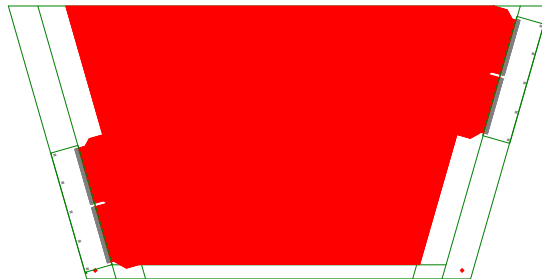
Layout of the innermost readout PCB of the large sector, indicating along the sides the location of the contacts for the connection to the front-end boards and the outline of the front-end boards together with the ground contact connectors.
